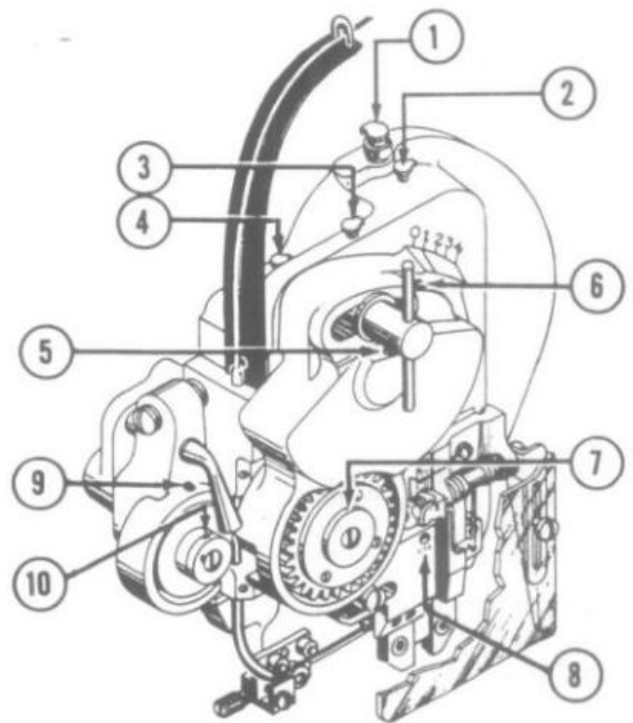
Wire Feed Brake Tension and Wire Guide Adjustments (Long Draw Heads)
